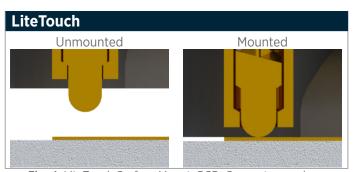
LiteTouch Surface Mount PCB Connectors make an electrical connection without deforming the PCB trace.
